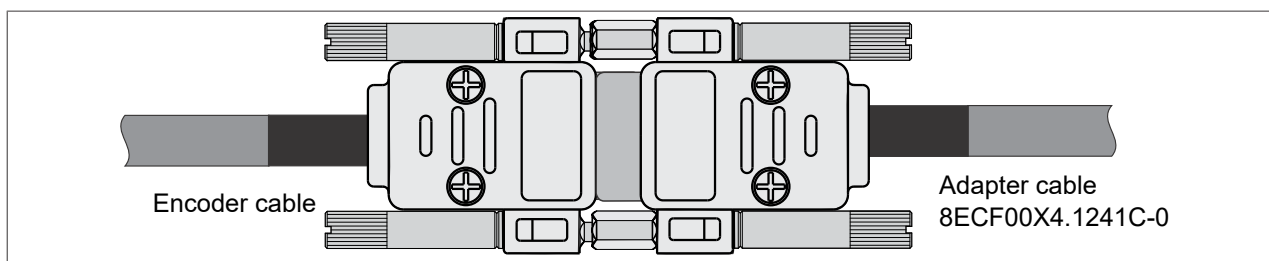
Screwing together the DSUB connectors on the adapter cable and encoder cable
